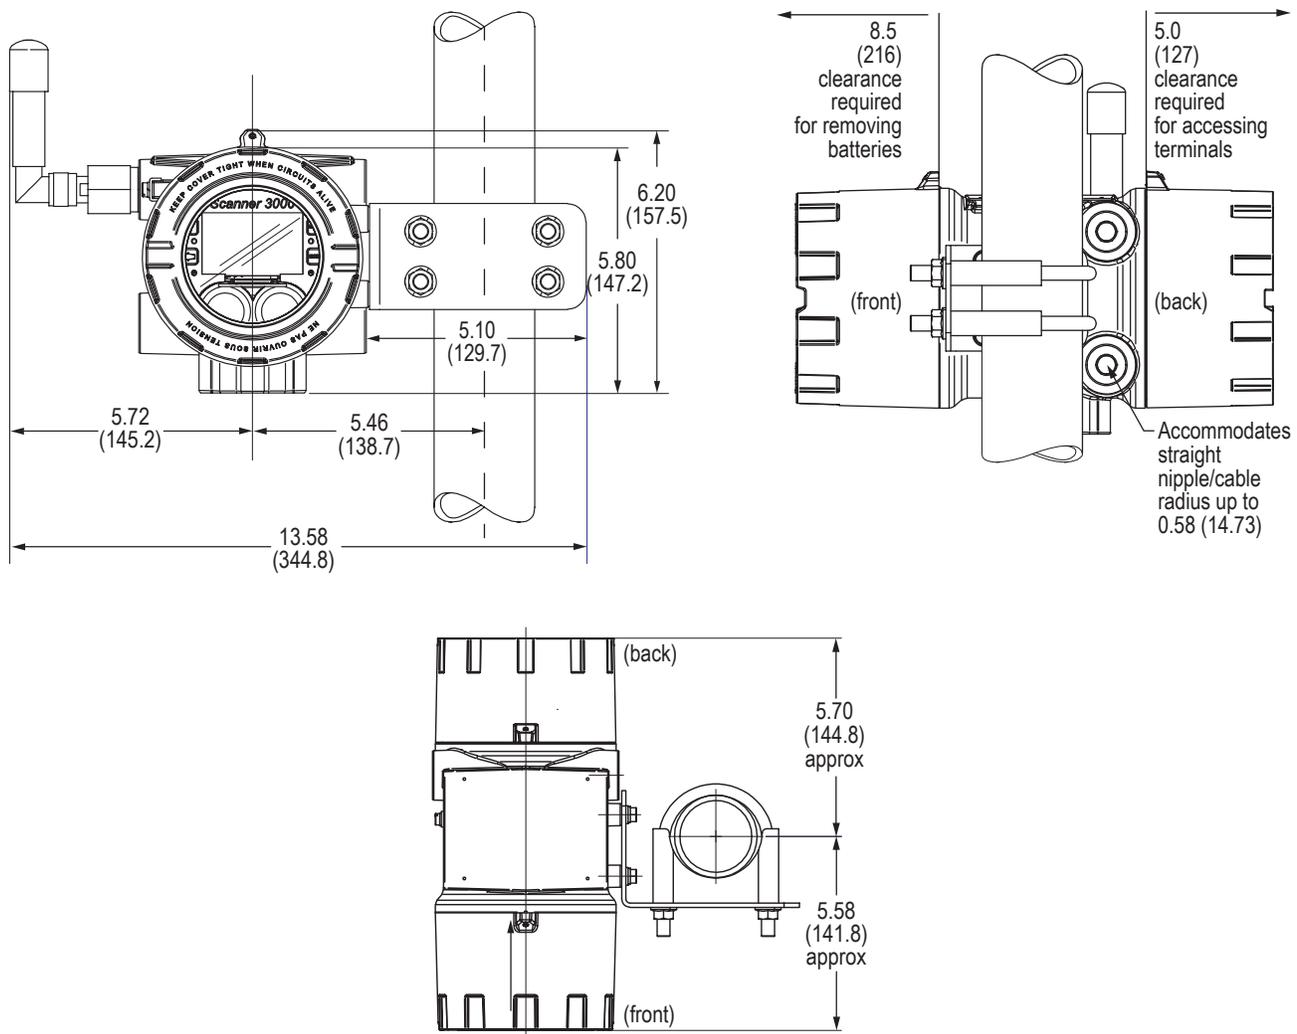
Scanner 3100 remote-mounted with a 2-in. pole mount kit; dimensions are shown in inches (mm); see for dimensions with MVT
